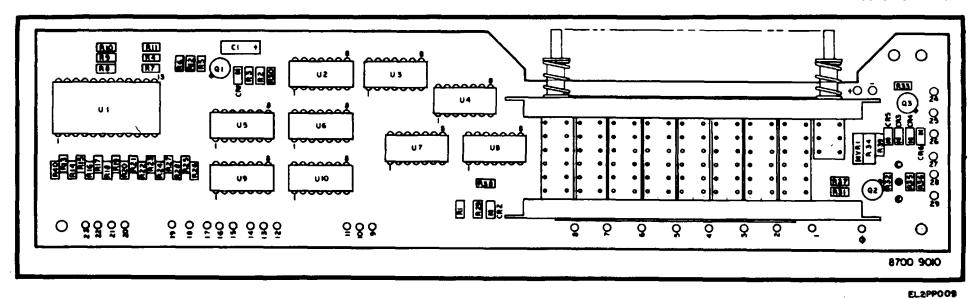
Distortion and Message Generator Assembly A-2, Component Location Diagram.
